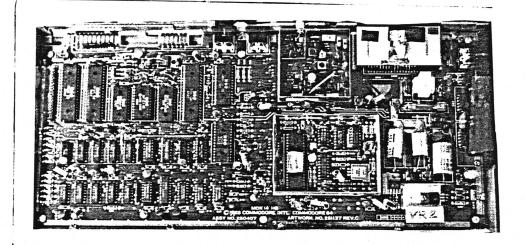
Later generation 64 PCB layout (Position of parts may differ from discription)
